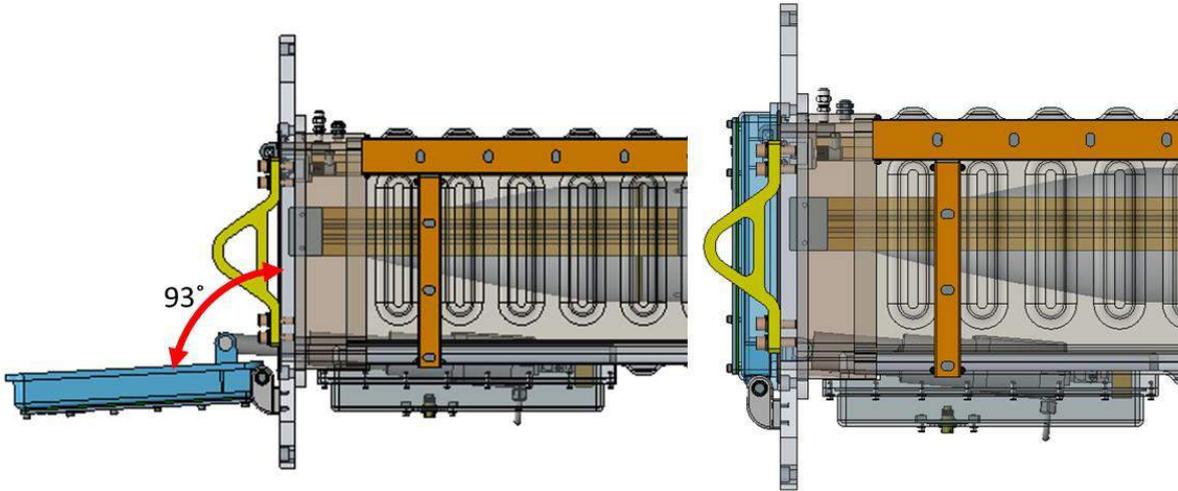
Front Hatch Door Opening/Closing Mechanism
